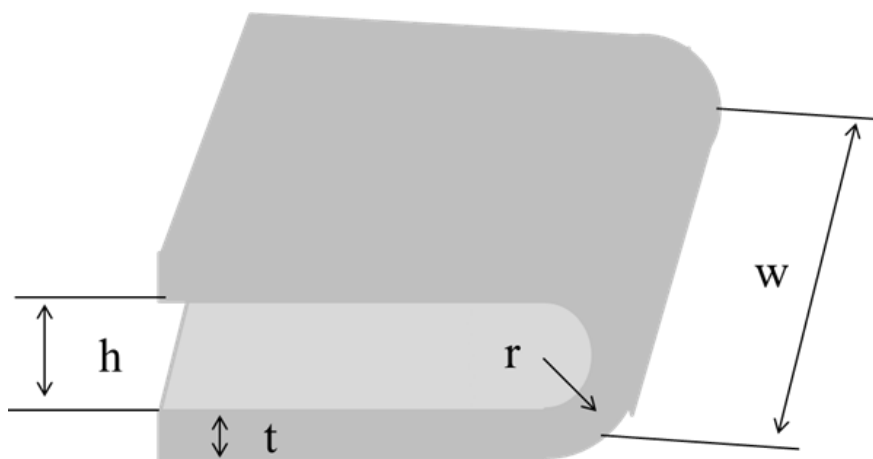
The single bend geometry and dimensional measurements taken of a sample film.
